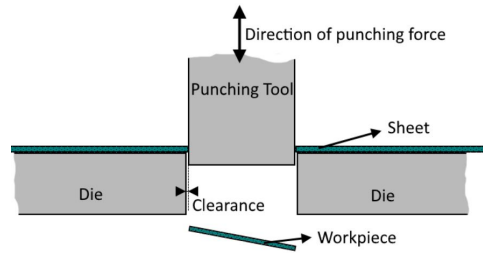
Side view of the punching process on sheets with indication of punching clearance between the punch and die.
